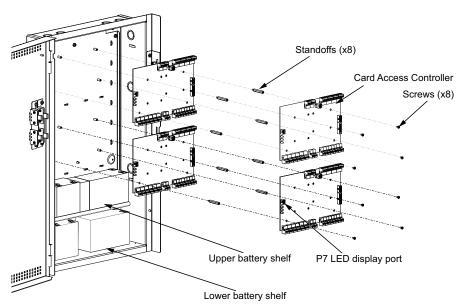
Mounting controller boards in TX3-CX-4-A-256, TX3-CX-4K-A-256
